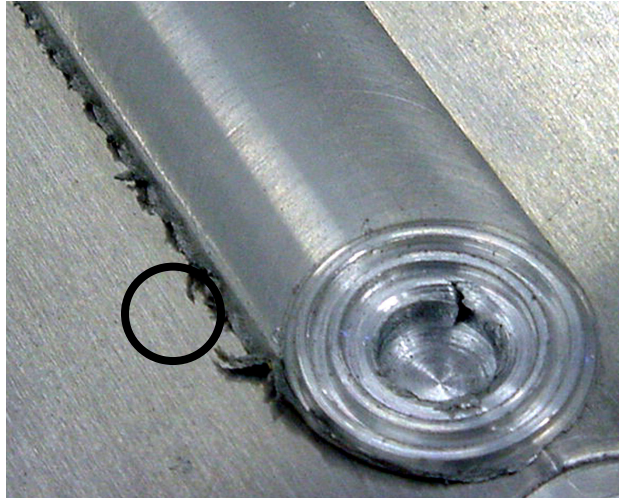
A sub-surface wormhole visible at the end of the weld run
